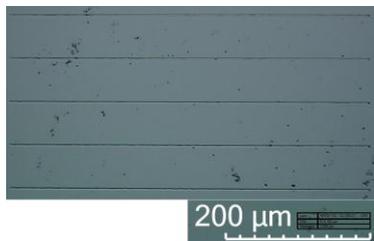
Five machined nano patterns having no brittle fracture nor burr on a Si wafer
